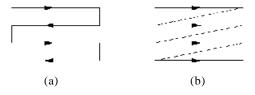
In bidirectional milling, the cutting edge changes alternatively left and right sides: (a) zig-zag and (b) retract-rapid-engage.
